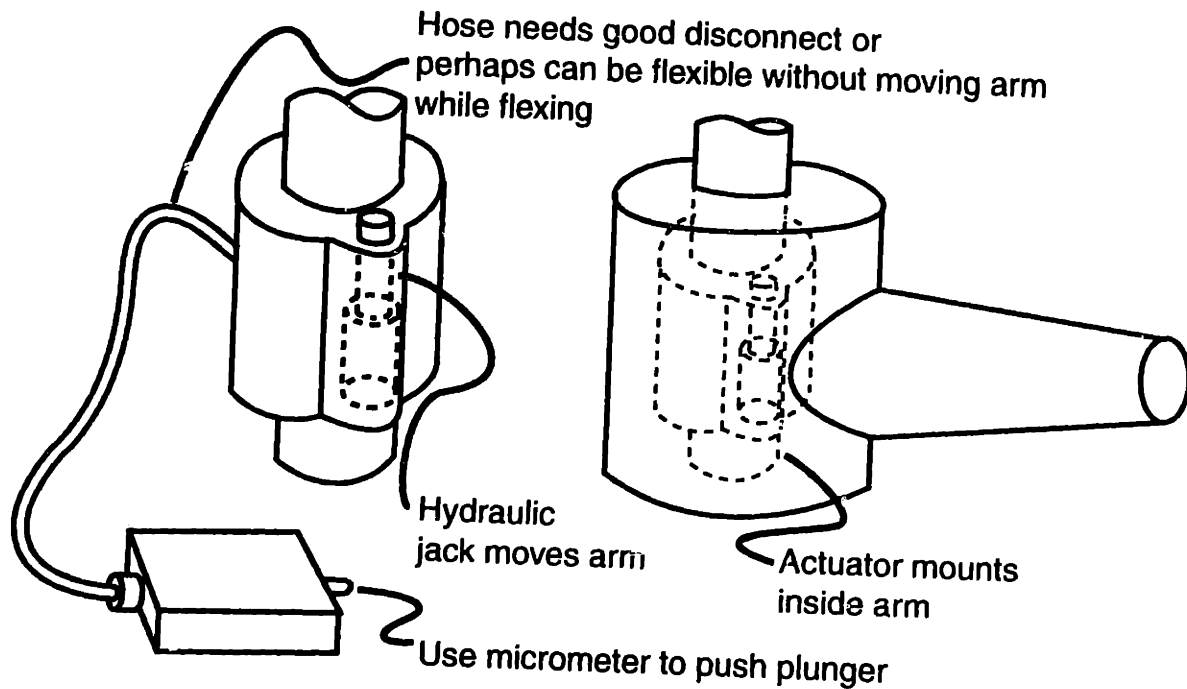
Concept 8 - Hydraulic jack with linear bearing.
